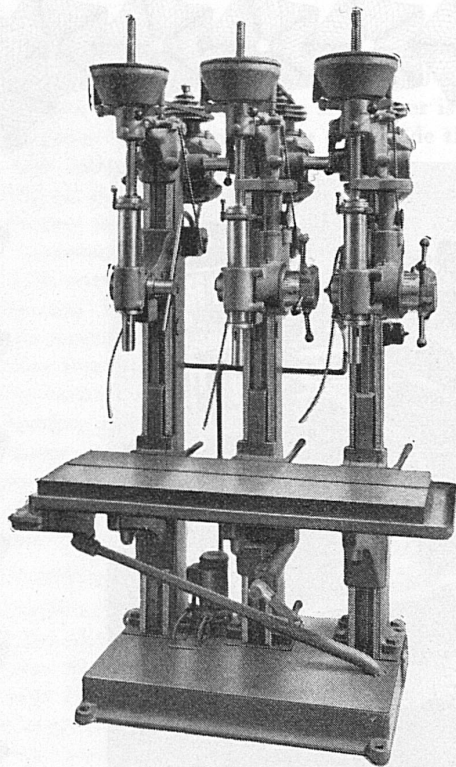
High Speed «Schweiter» Drilling Machine.
